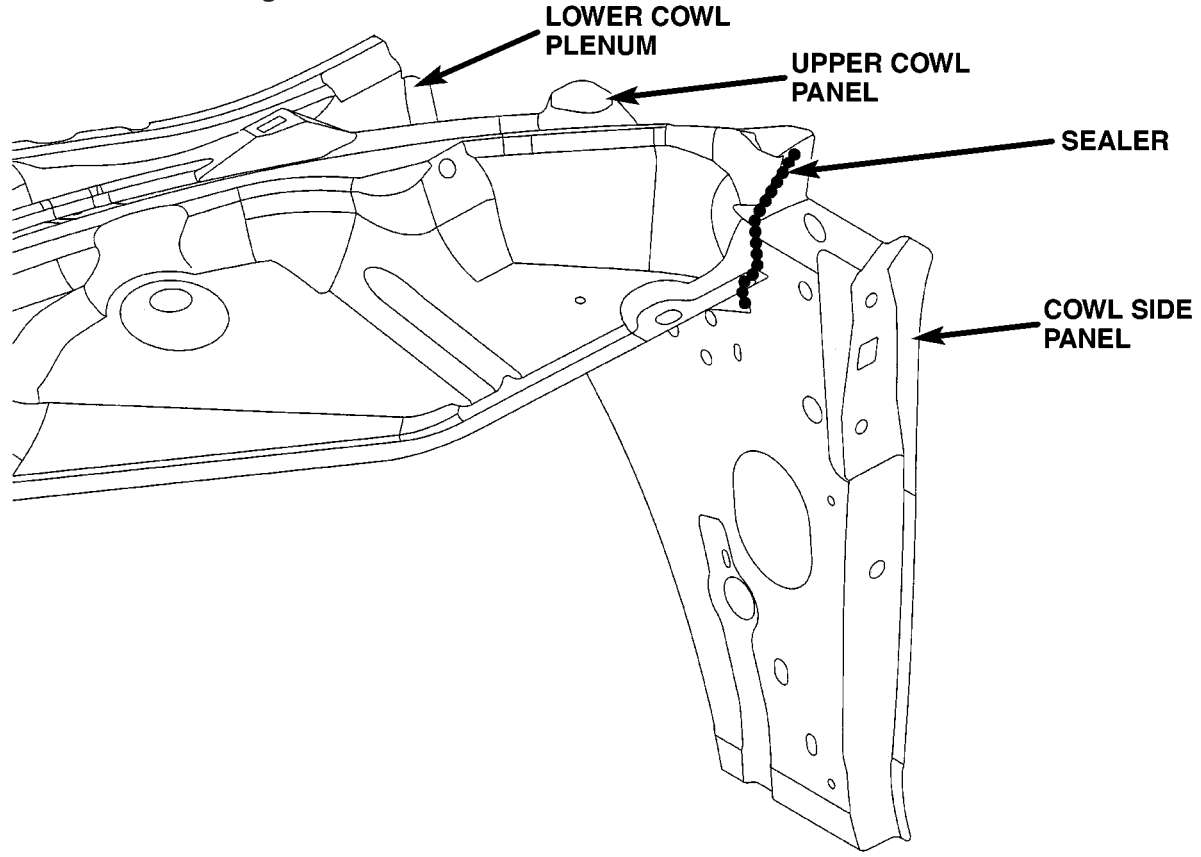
UPPER & LOWER COWL PLENUM & COWL SIDE PANEL
